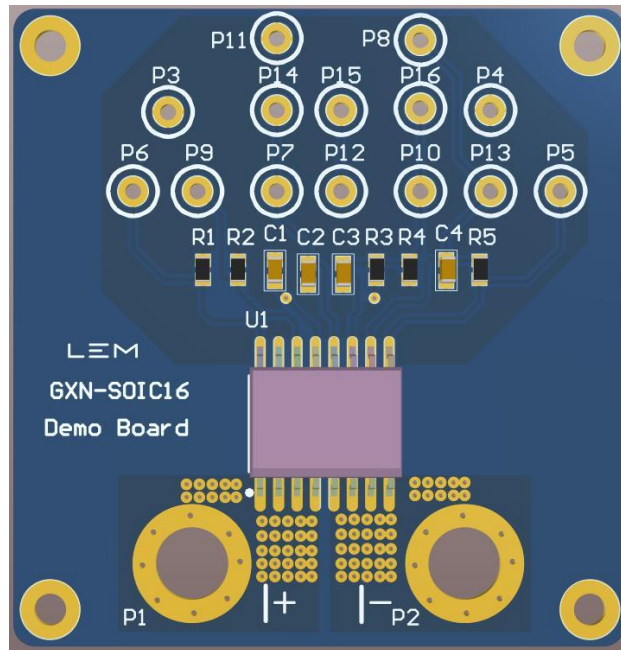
GXN ANC\_SOIC16 Package PCB Layout
